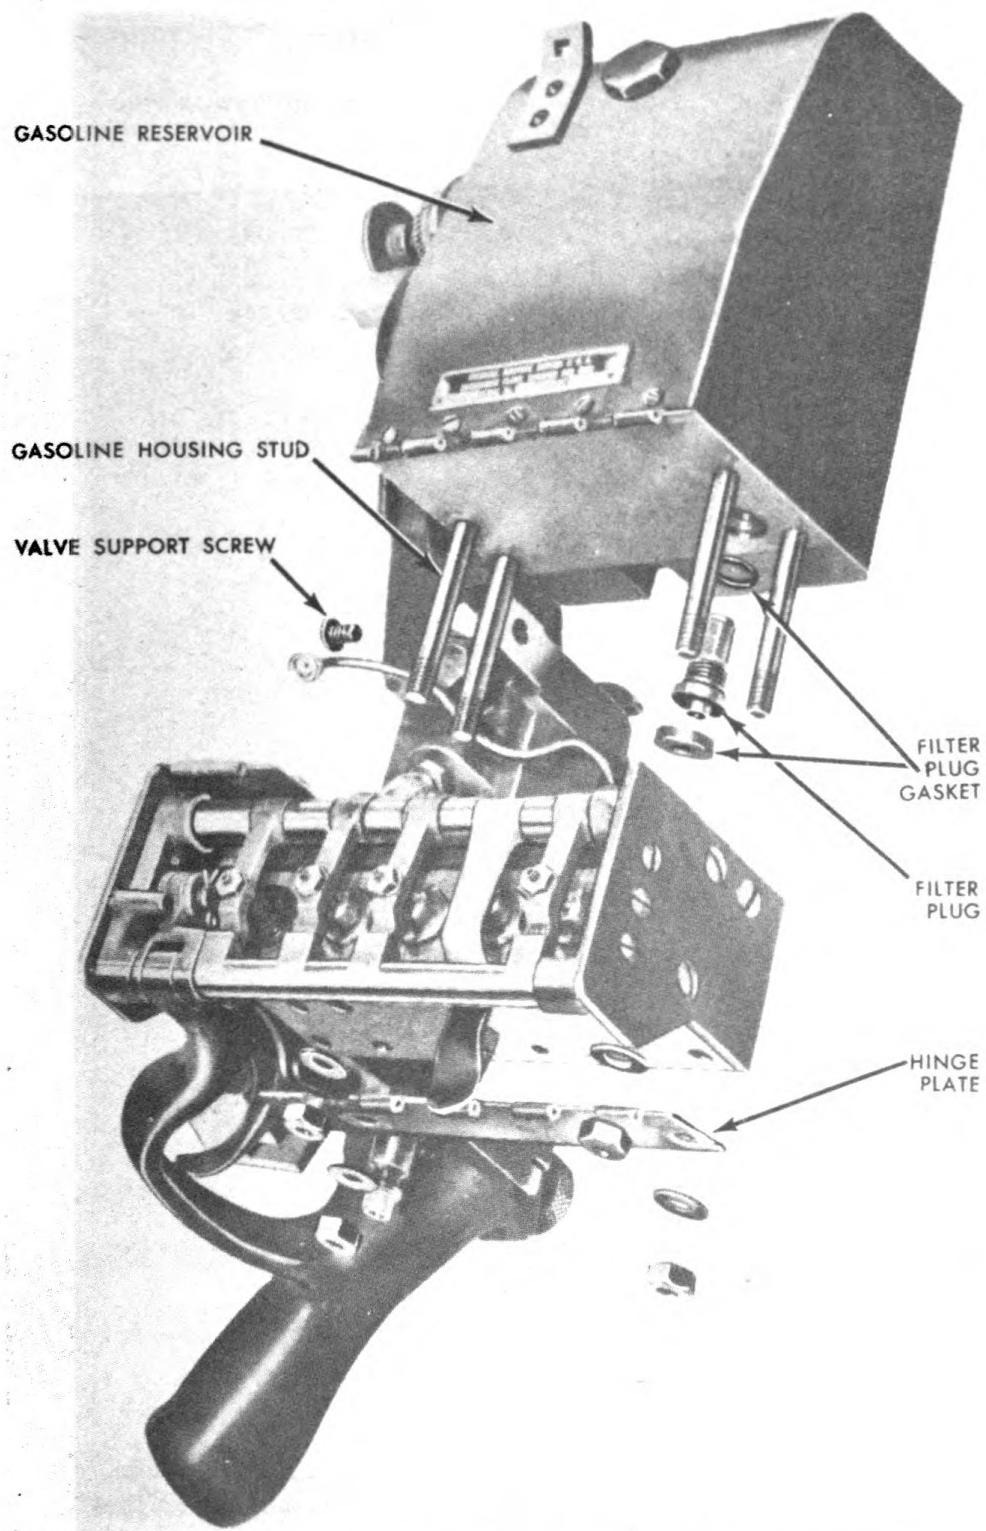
Gasoline housing assembly separated from remainder of gun control assembly.
